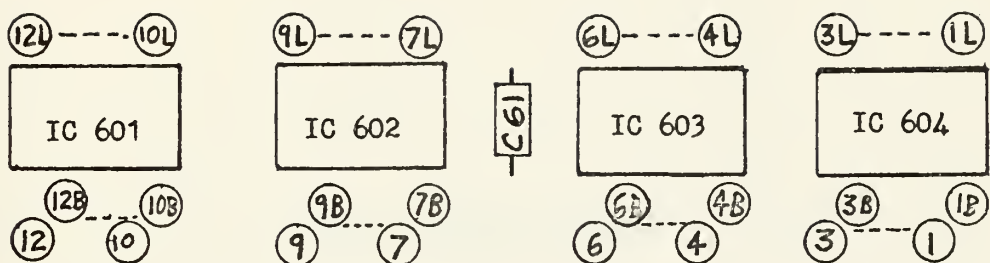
DRIVER BOARD (DRI) COMPONENT LAYOUT
